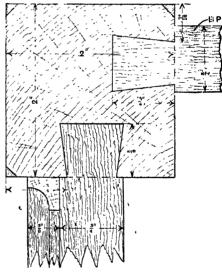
Section of Pillar and Dovetails of Side and Panels of Portable Desk.
